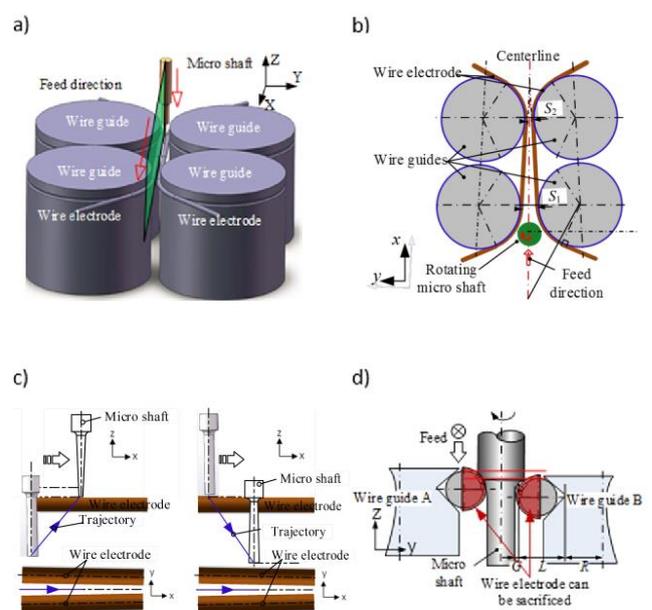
Schematic diagrams of TS-WEDG: (a) perspective view, and (b) top view. Possible machining strategies for machining taper micro rods: (c) and (d).
